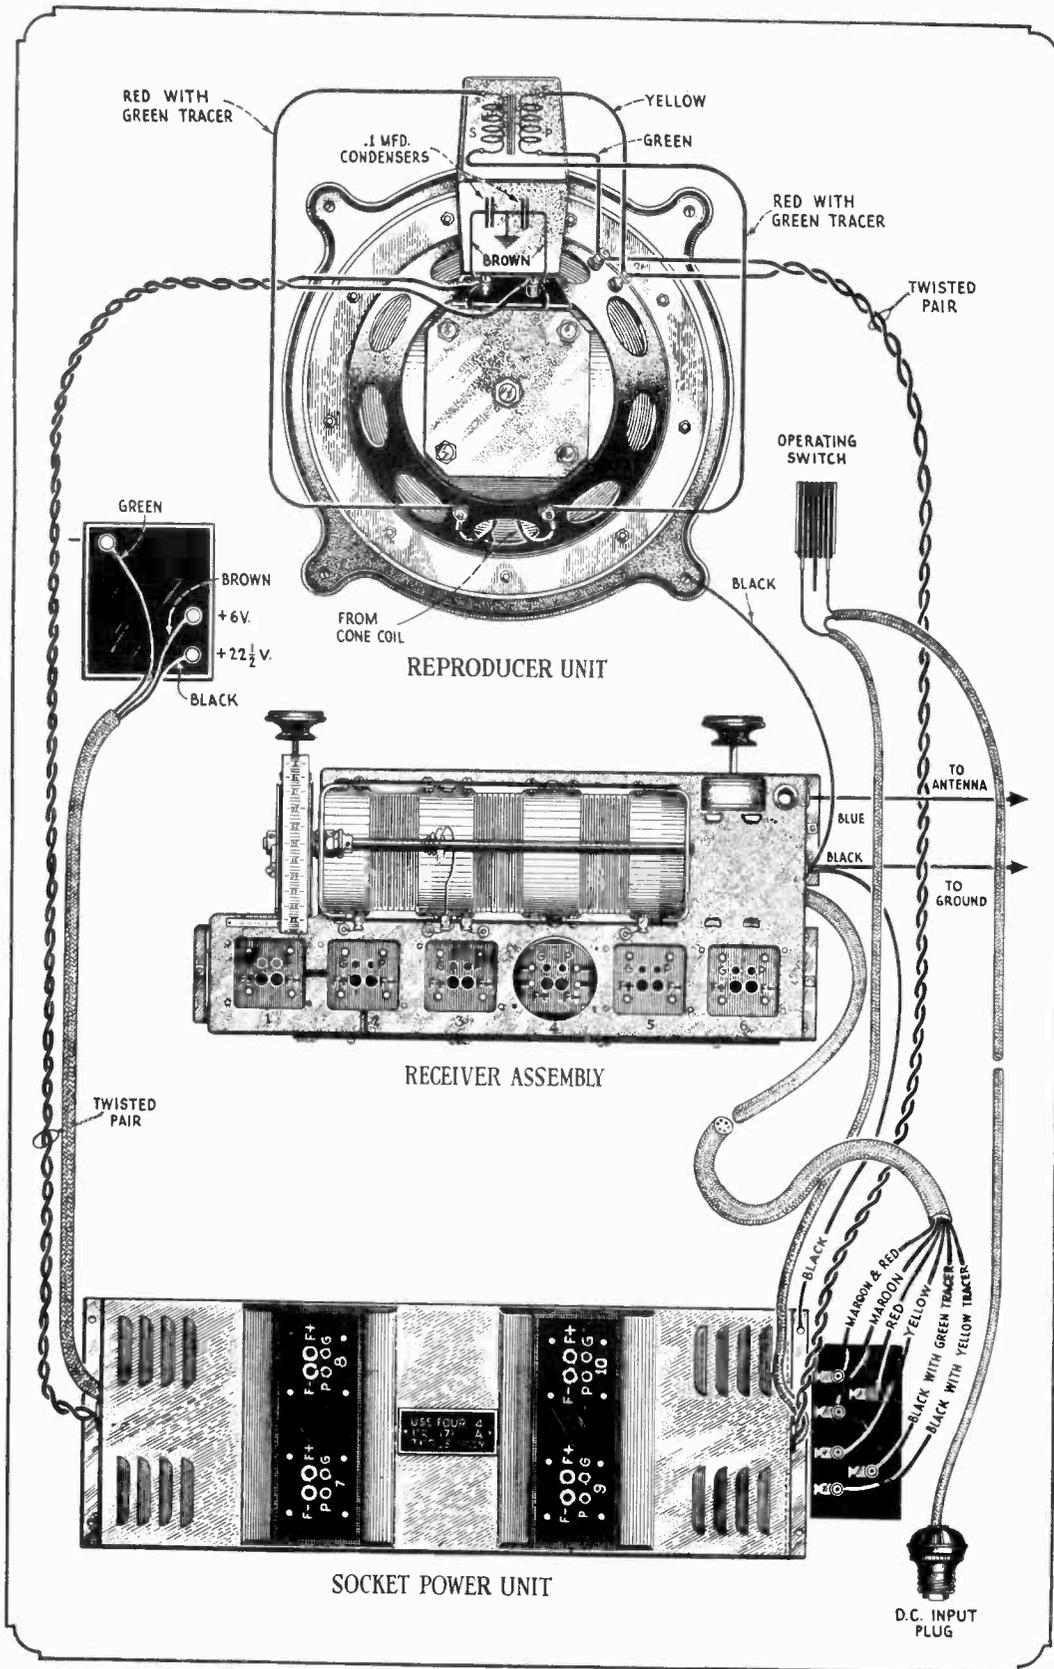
Complete layout and connections of reproducer, receiver and socket power unit
